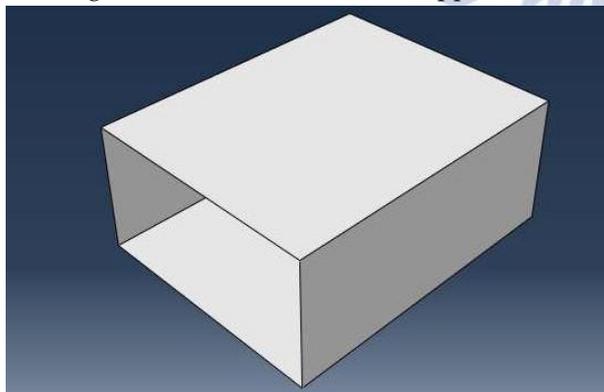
Crash Tube CAD model (Test no. 2)
